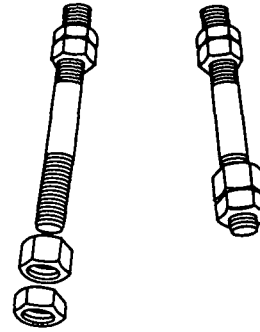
ONE ASSEMBLY IS FURNISHED FOR EACH CLEARANCE HOLE OF ALL GEAR SPLITS.
